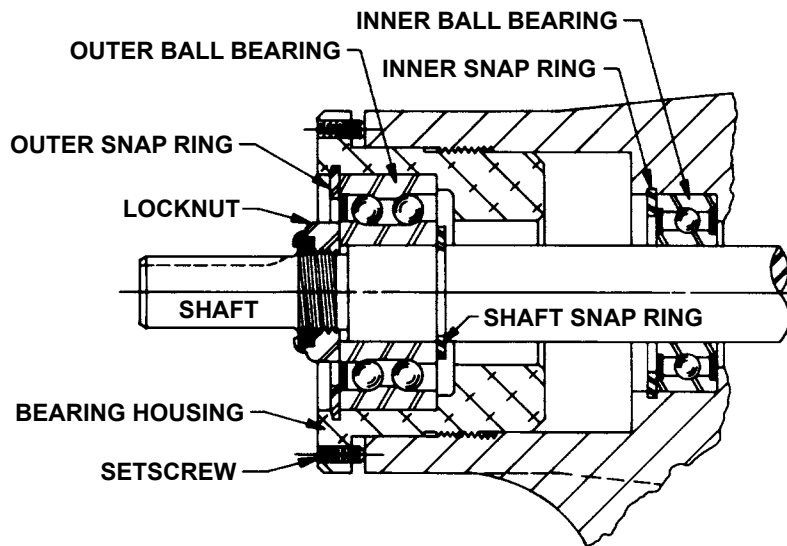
THRUST BEARING ASSEMBLY GG, HJ AND HL SIZES
